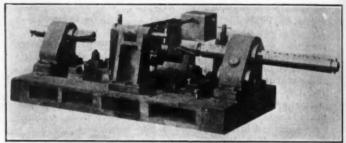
Rough-Boring Fixture for Crankshaft and for Camshaft Holes The Two Crank Boring Bars, with Core Drills Attached, Are Shown in Place
